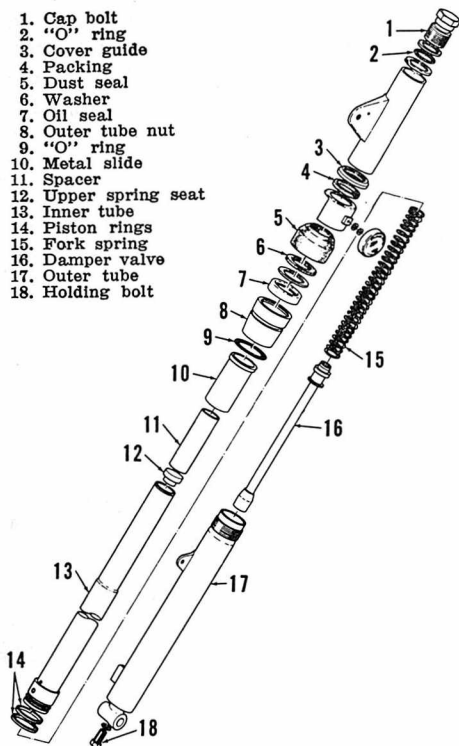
Exploded view of late DT-1 front suspension unit. Early models had similar construction. Holding bolt (16) must be removed to disassemble unit.
